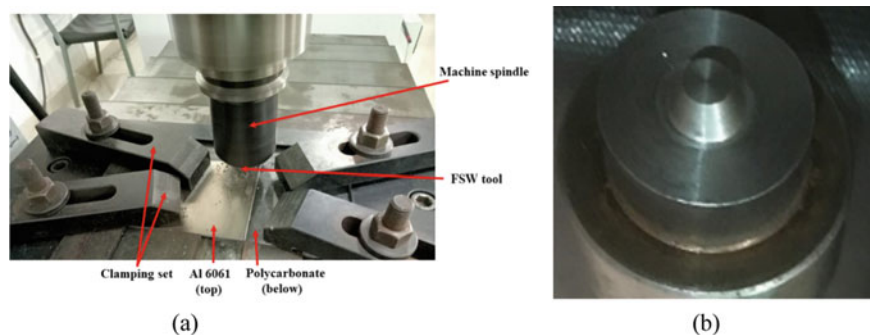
a Friction stir lap welding set up. b H13 steel tool with taper pin profile
